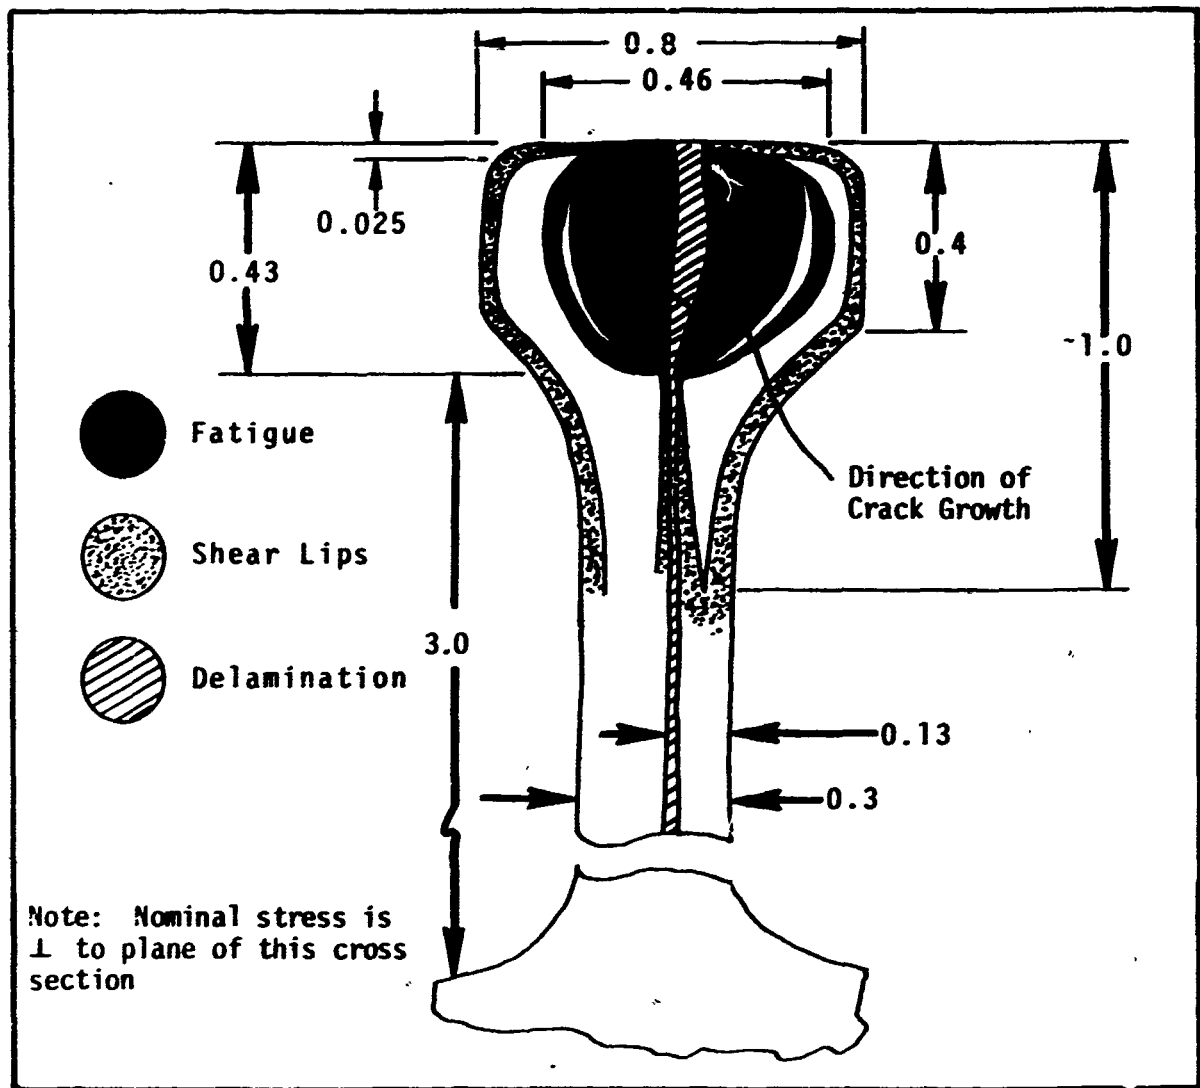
Fracture Surface Appearance of Wing Carry-Through Forging
